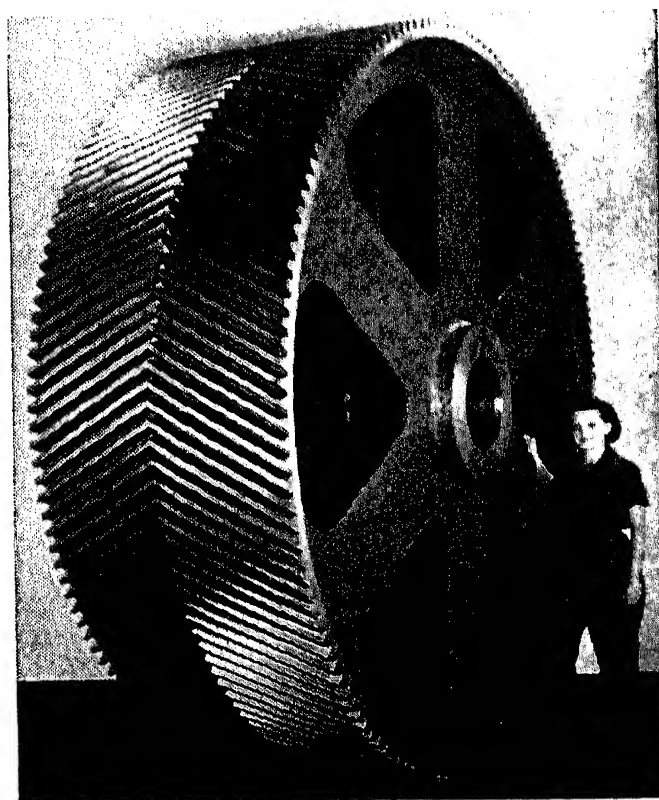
A continuous tooth herringbone gear. (Courtesy Foote Bros. Gear and Machine Co.)
